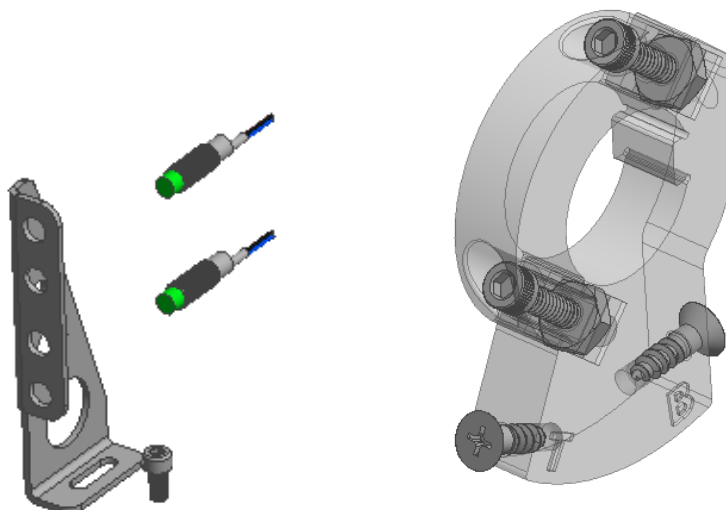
Proximity flag assembly and M12 sensor installation
